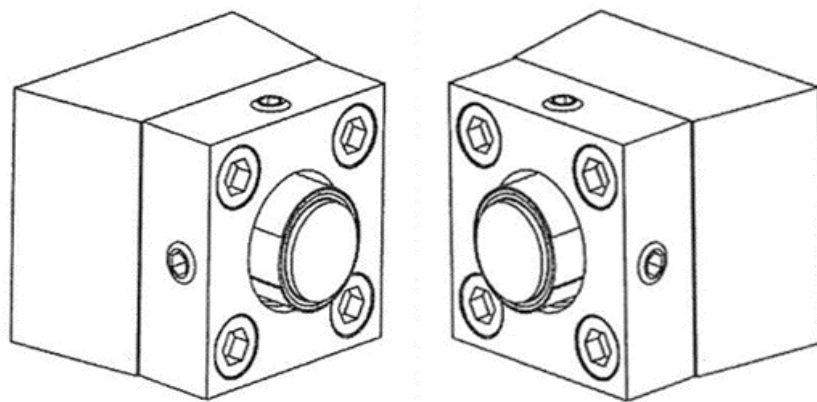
Schematic of the assembled ISO-T™ compression fixture [75].
